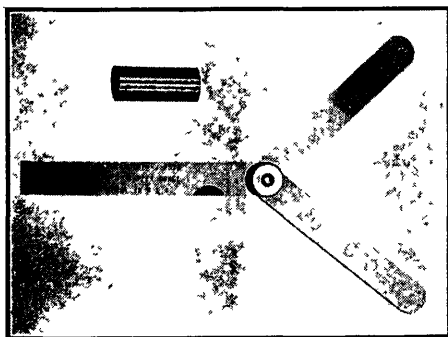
Special feeler gauge and plug gauge set for checking tappet clearance in engines with hydraulic valve lifters, 1940-52
